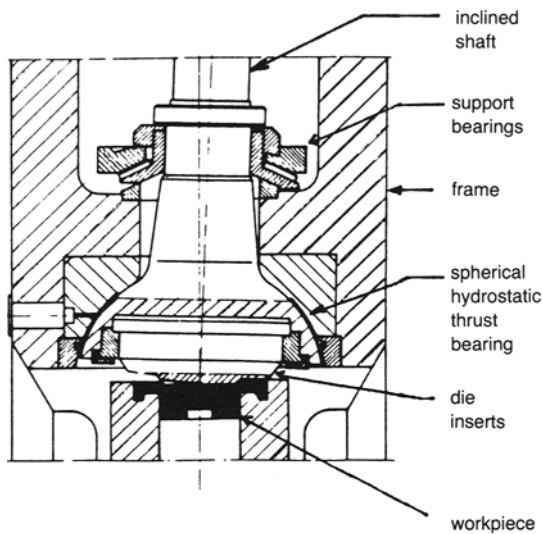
Cross-sectional view of the inclined dies of PXW100A [12].
